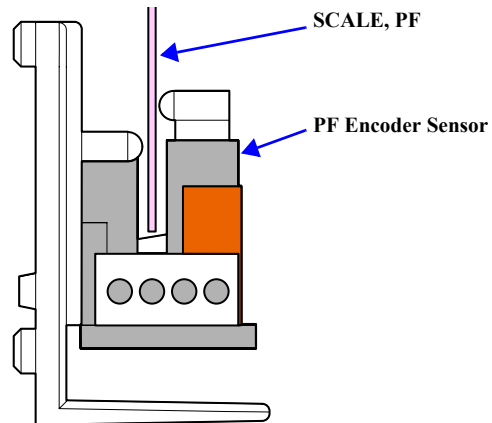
Reinstalling the PF Encoder Mounting Plate
